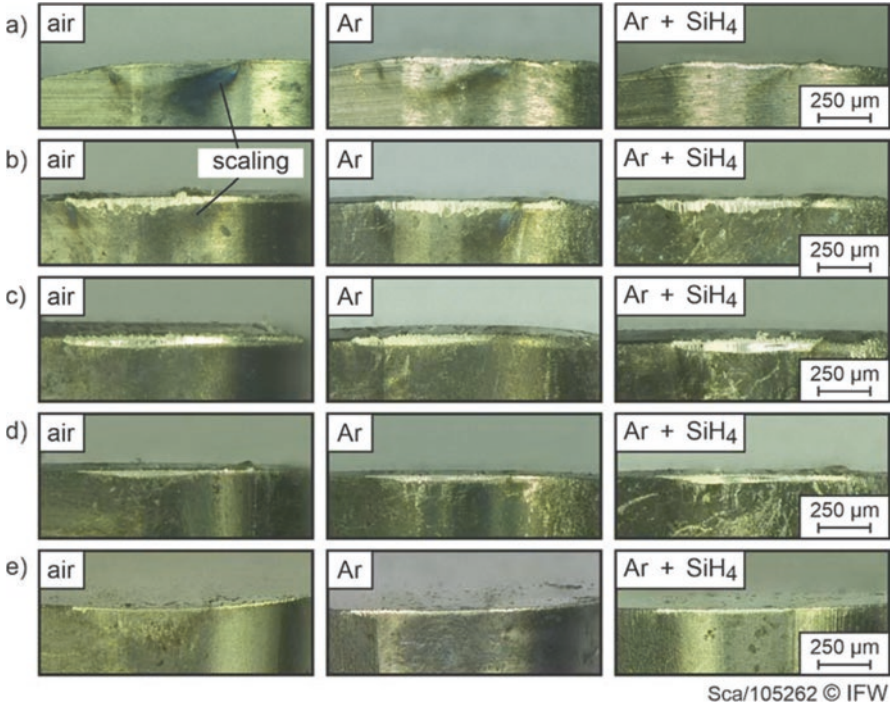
Flank wear after 2.5 min at a) the carbide tool b) the CBN010 tool c) the CBN200 tool d) the NCB100 tool and e) the PCD tool
